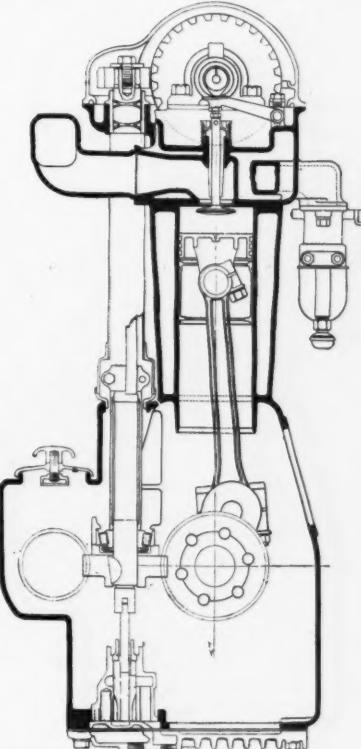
Section through the Weidley motor which shows the valves mounted in the head. No cages are used in this type.
